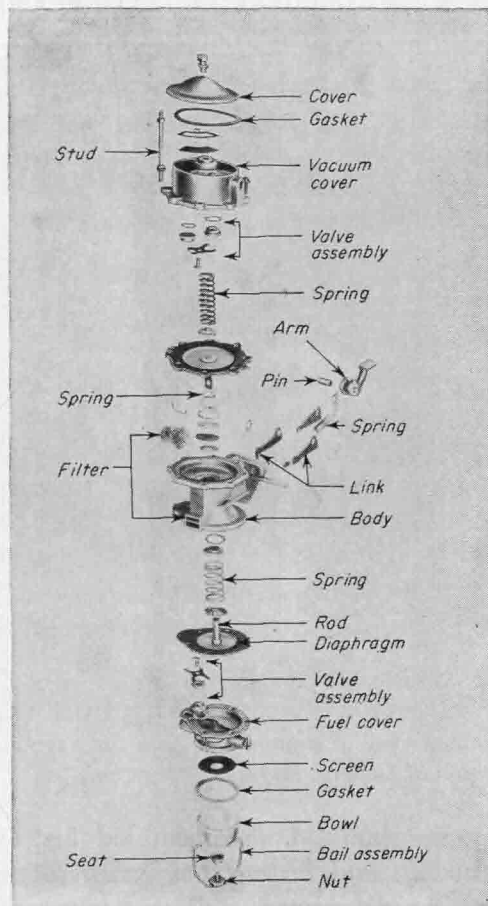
Disassembled view of combination fuel and vacuum pump. (Plymouth Division of Chrysler Corporation)
